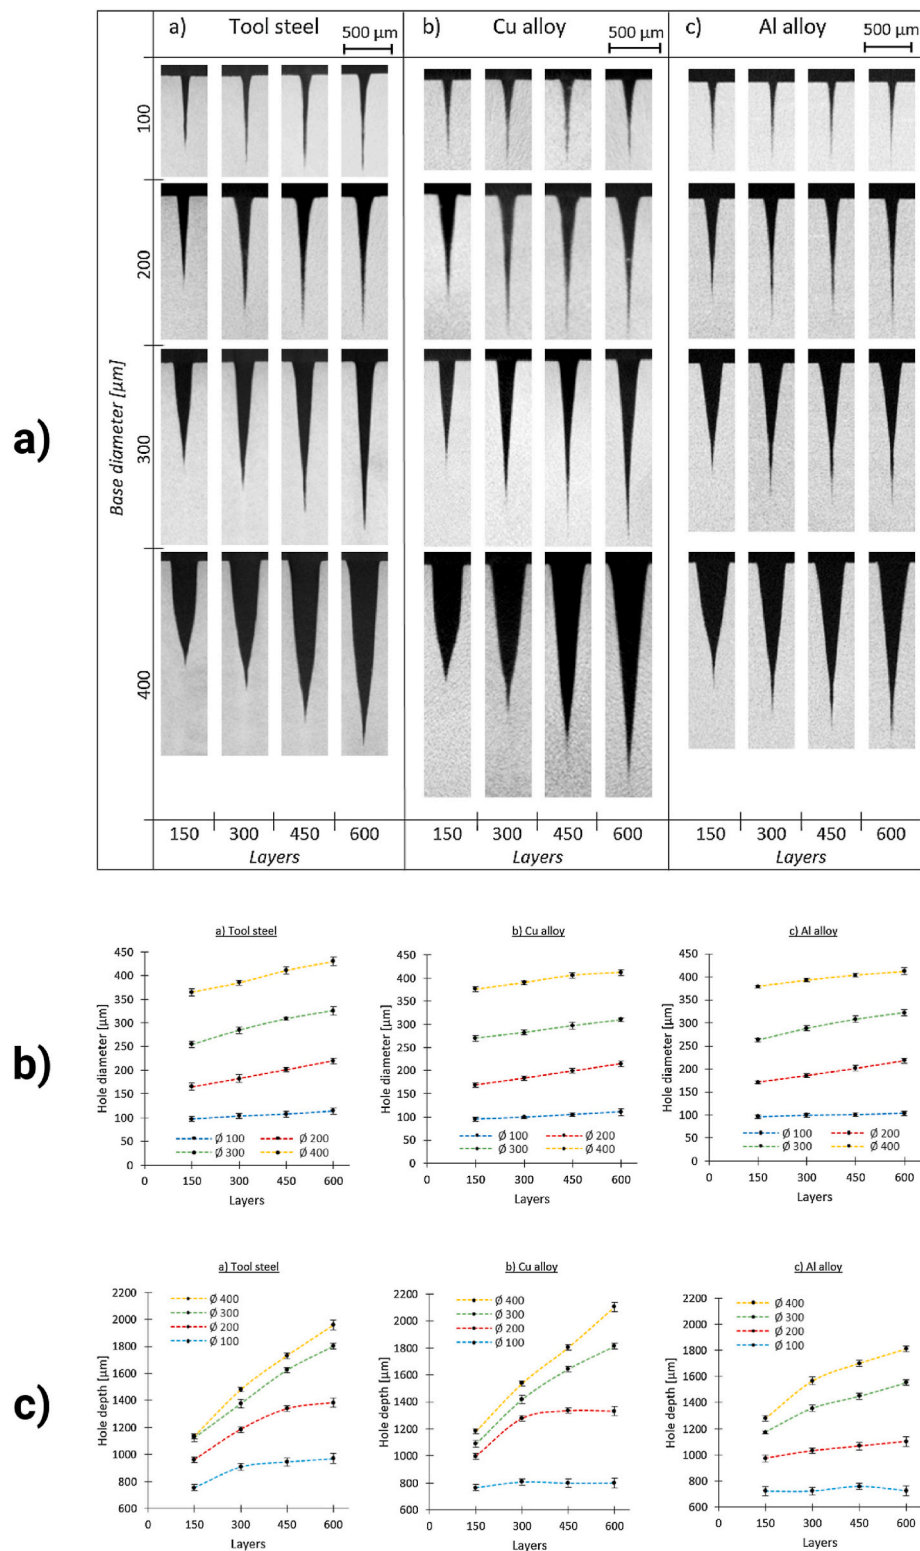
The geometrical comparison of laser ablated micro-holes per variables, including base diameters (100, 200, 300, and 400 μm), number of laser machining layers (150, 300, 450, and 600) and different mould materials (tool steel, copper alloy, and aluminium alloy). a) Cross-sectional images of micro-cavities in various base diameters and layer numbers. b) A comparison of hole diameter versus the number of layers. c) A comparison of hole depth versus the number of layers. Adapted with permission from Ref. [102], Copyright 2021, Elsevier.
